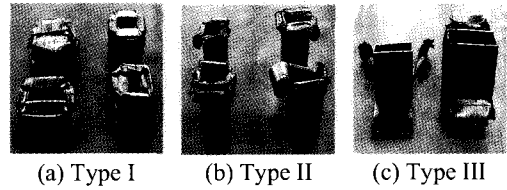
Typical collapse modes of aluminum extruded beams with rectangular cross section
